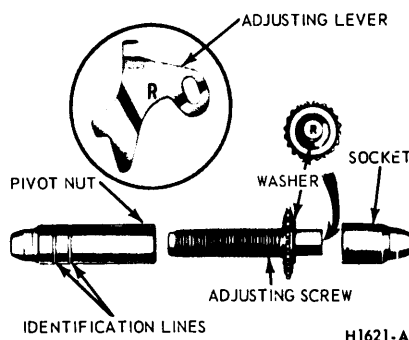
Adjusting Screw and Lever Identification—F-100-250, E-100-200 and Bronco
